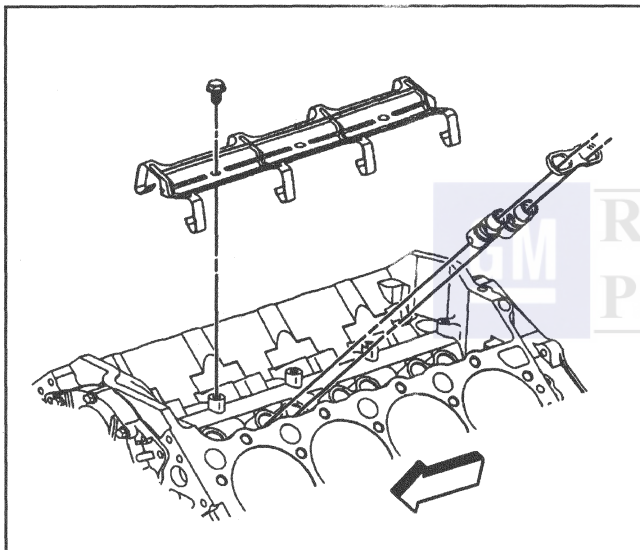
Valve Lifters, Valve Lifter Guide, and Valve Lifter Guide Retainer
